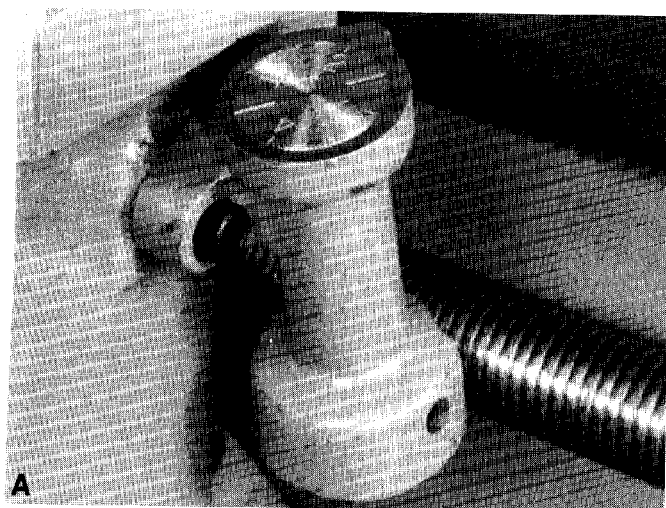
Positioning a cutting tool for machining threads, using a center gage.
